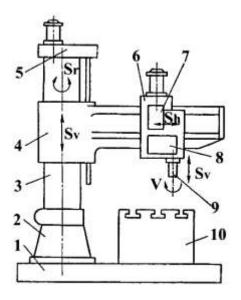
Radial drilling machine: 1 - plate; 2 - bed; $3 - \text{rotating } (S_r)$ column; 4 - rotating together with column and moving up and down (S_v) traverse; 5 - moving mechanism; 6 - spindle head, moving horizontally (S_h) ; 7 - gear box of springle head; 8 - feed mechanism; 9 - spindle; 10 - table
